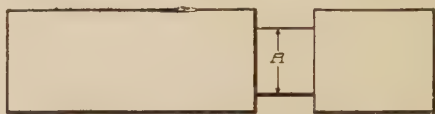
Cylindrical Piece Adapted to Use of Snap Gage
